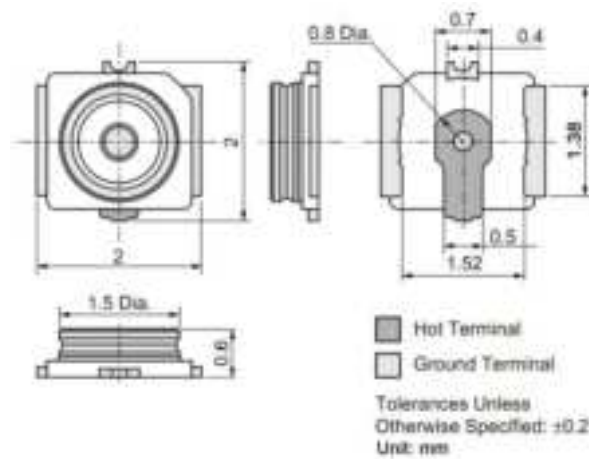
EM120R-GL&EM160R-GL RF Connector Dimensions (Unit: mm)
